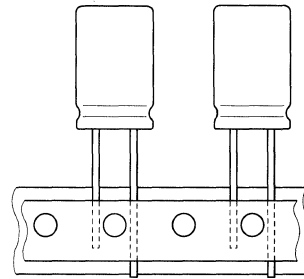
Form CB, cut leads; see Table 2 for dimensions.
